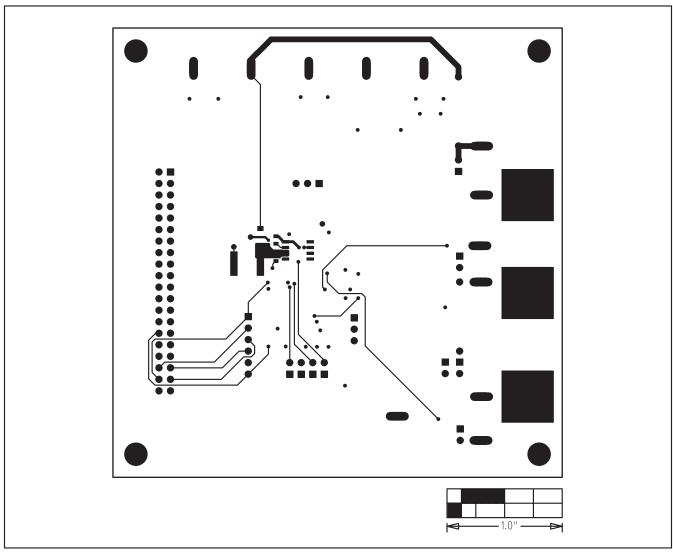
MAX5661 EV Kit PCB Layout—Solder Side
